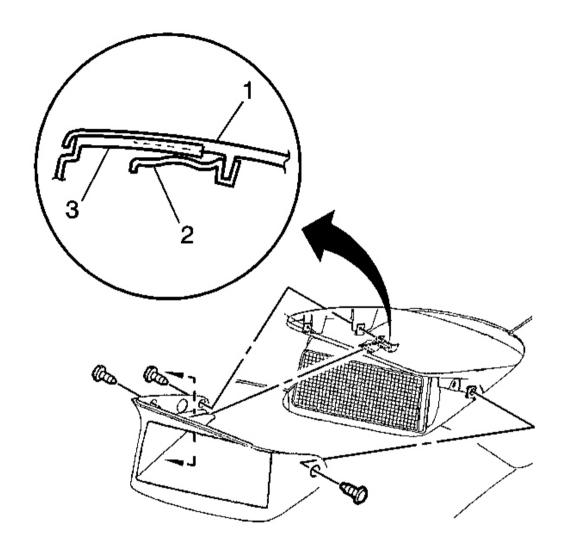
Headlamp Bezel To Headlamp Opening Door Courtesy of GENERAL MOTORS CORP.
